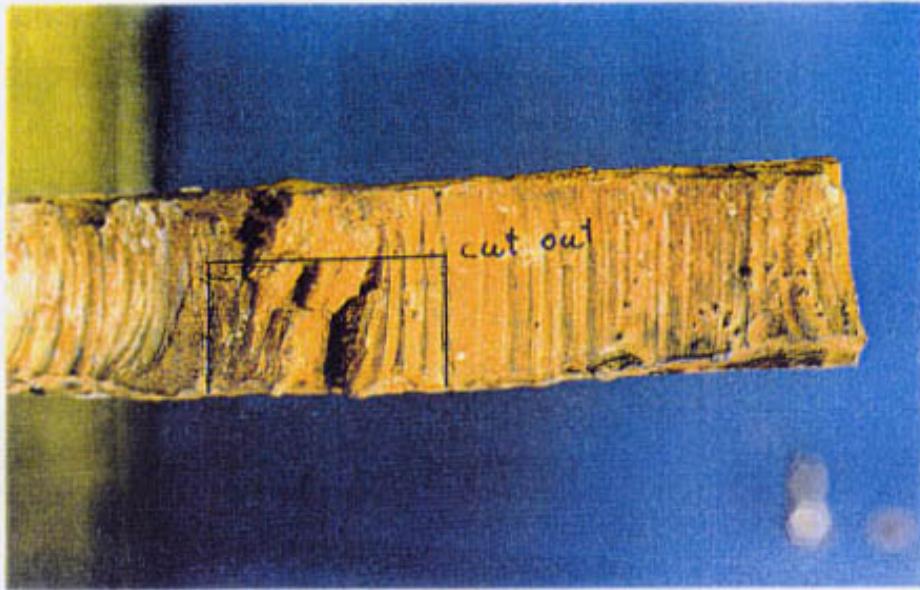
Fatigue crack start from flame cut marks at A3 fracture
